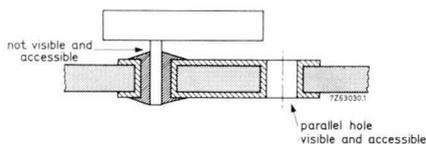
Solder joint hidden by component body. A parallel hole should be provided to allow a faulty interfacial connection to be made good.
